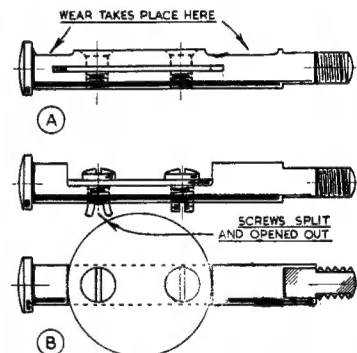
"A"—the worn throttle spindle; "B"—method of fitting a new spindle
